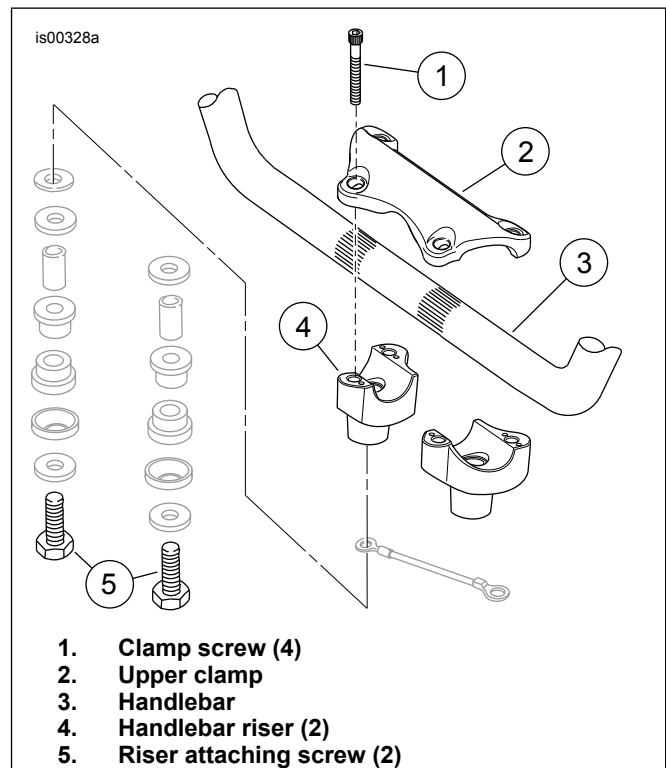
Handlebar Clamp and Risers (FLHR Models)
